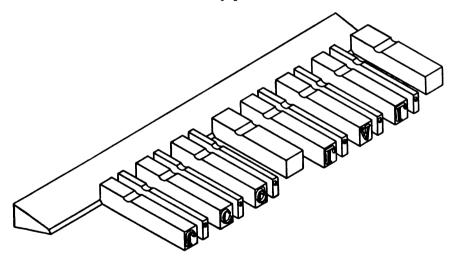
Grantype; comb with tang attached. Enlarged.
